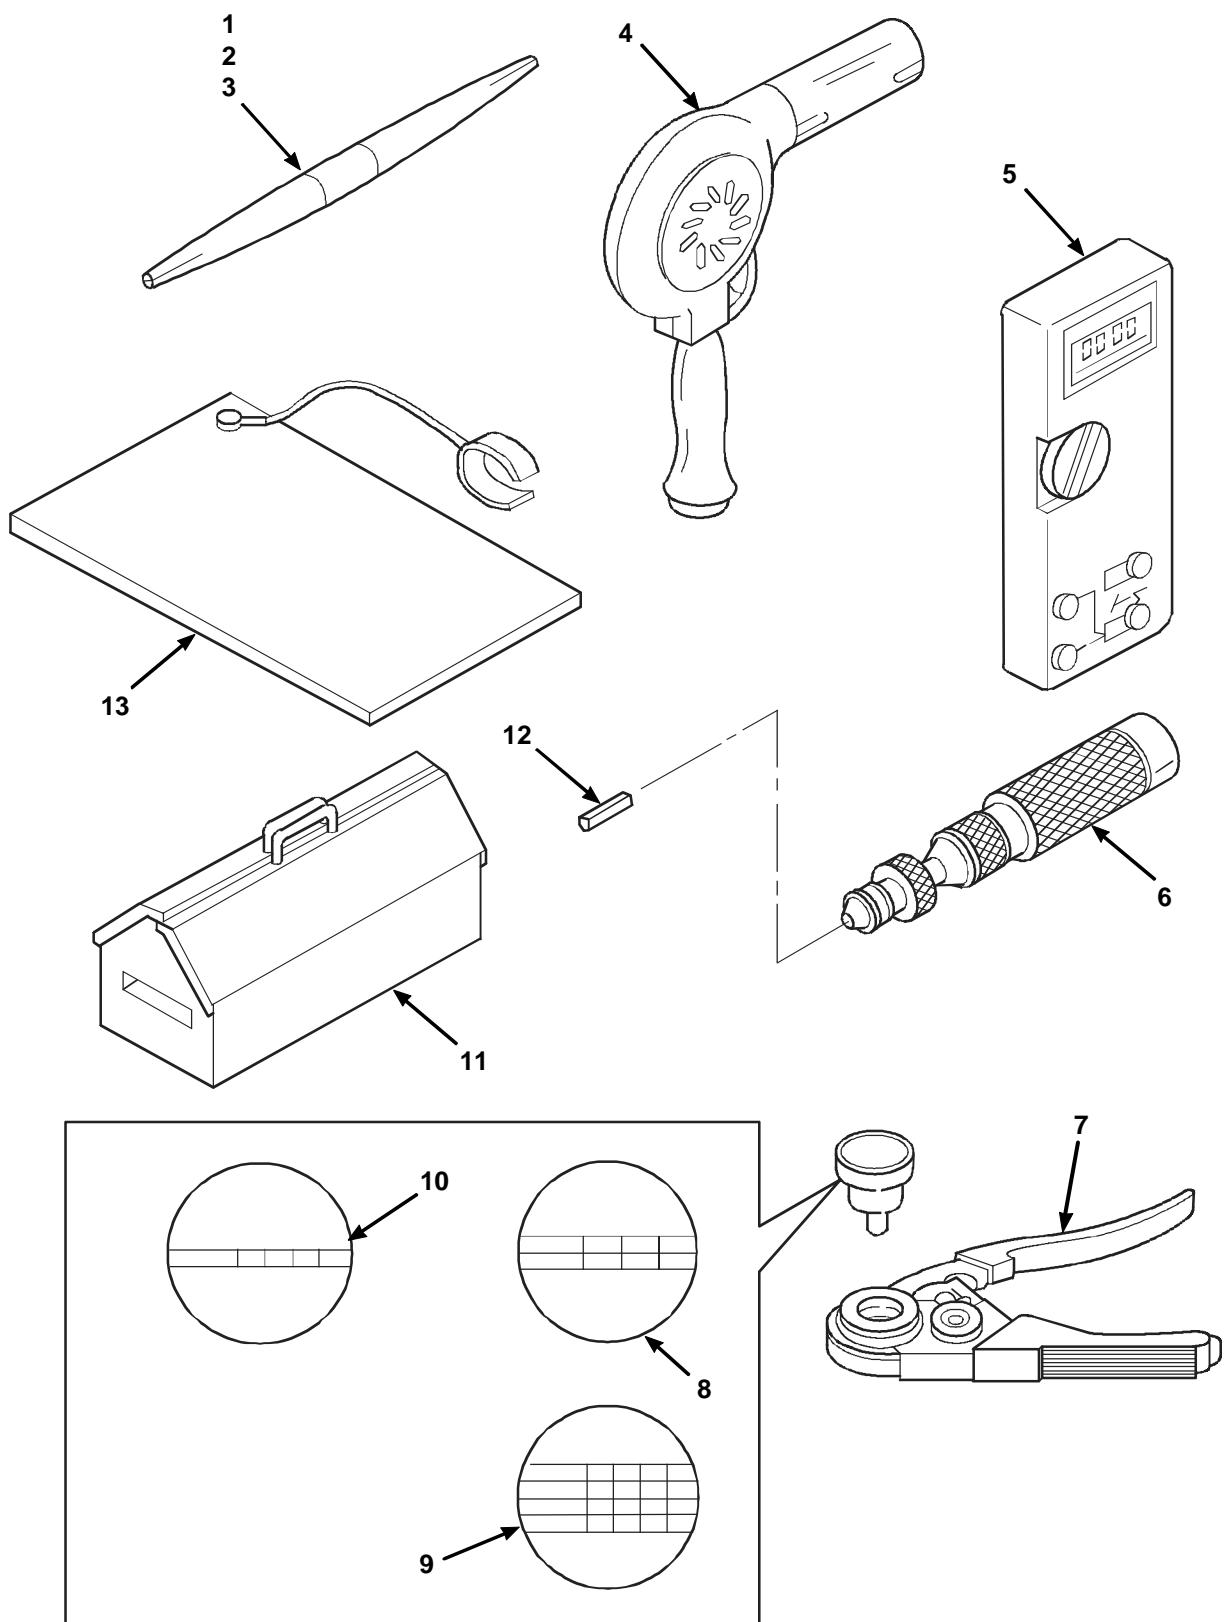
Special Support Equipment (Sheet 1 of 2)
